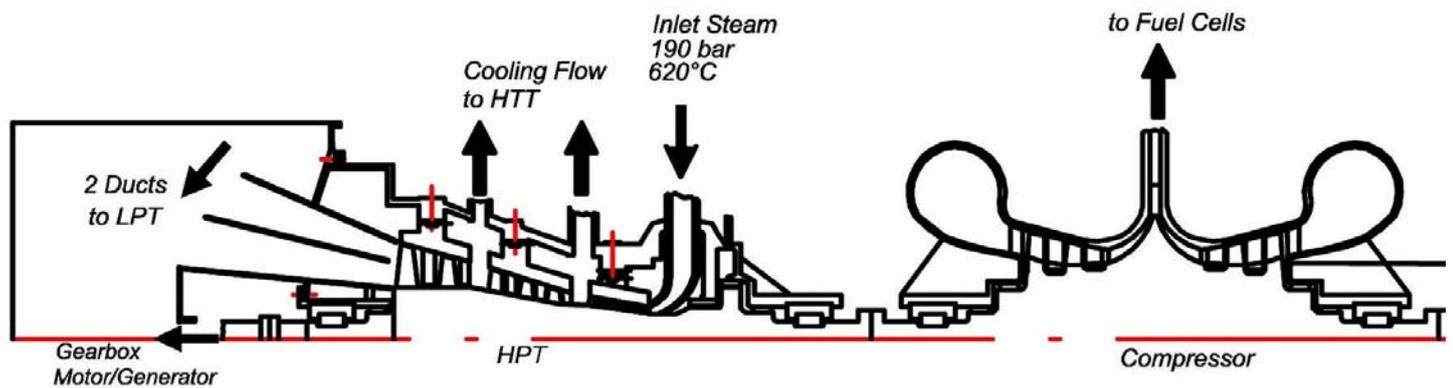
Design of the high pressure turbine HPT and the steam compressor.
